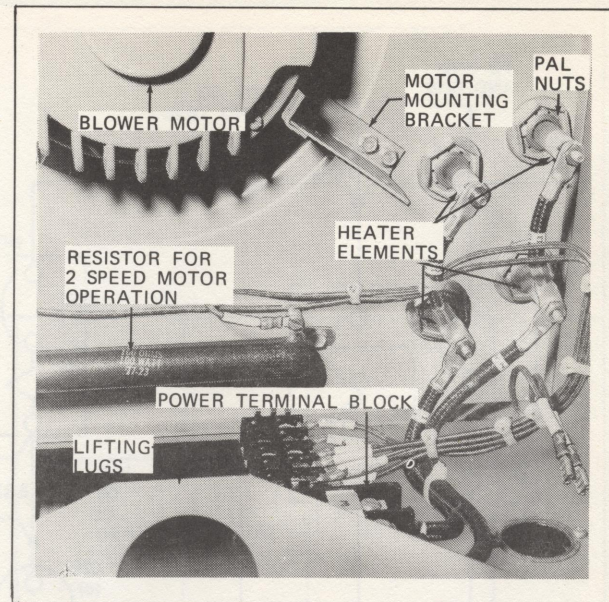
MOTOR BRACKET AND HEATING ELEMENTS.
